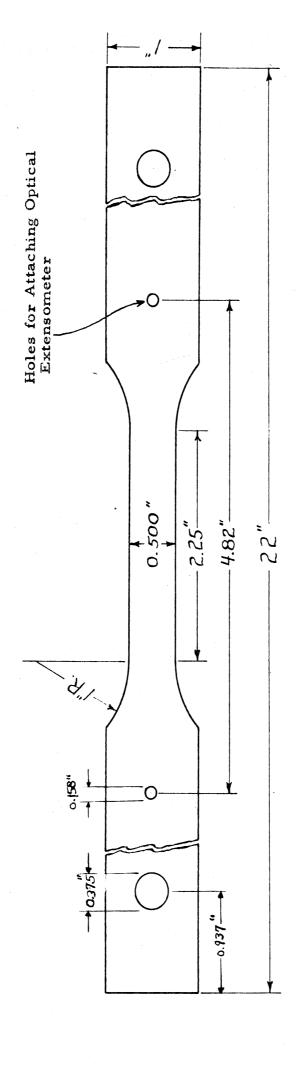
DIMENSIONS OF CREEP-RUPTURE SHEET SPECIMEN.
